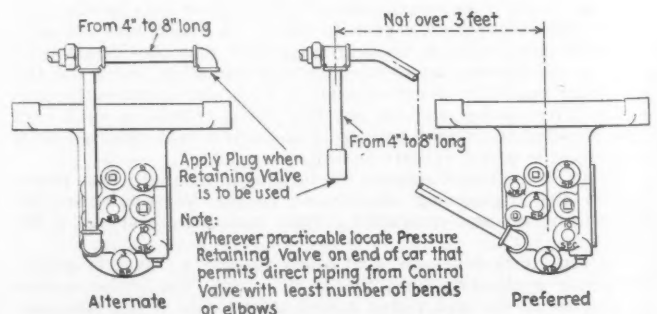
Proposed retaining valve piping for passenger equipment cars
